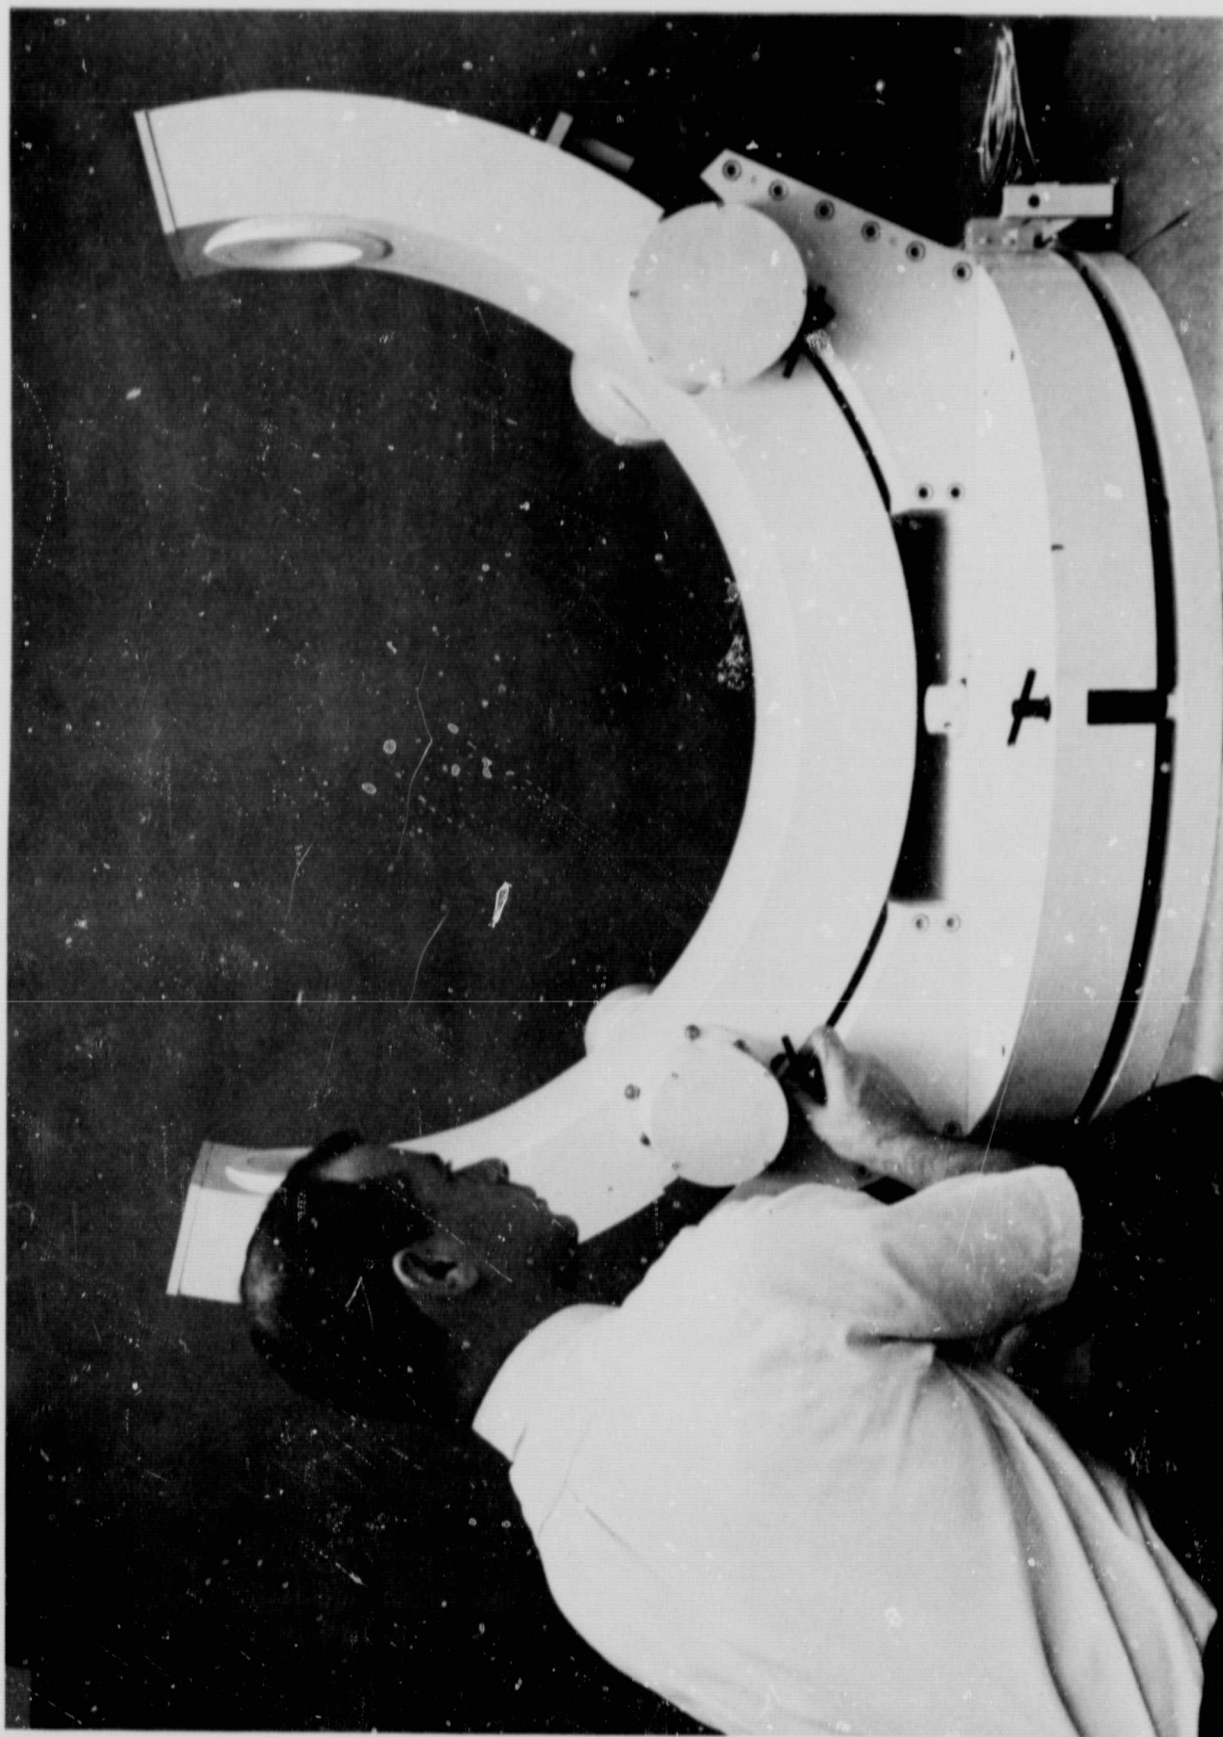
Roll-Axis Yoke Assembly Fitted to Azimuth-Axis Turntable Assembly.
